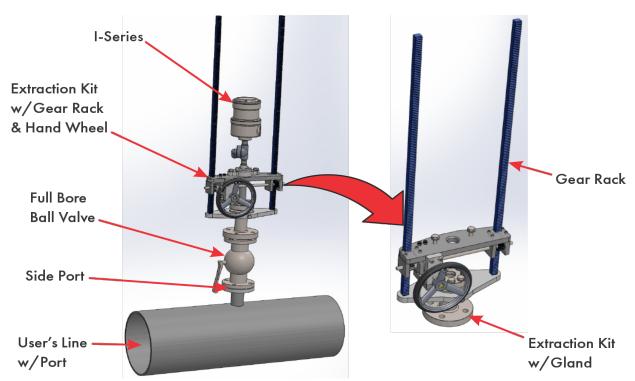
Installation into Larger Pipe through a 2" or 3" Side Port
